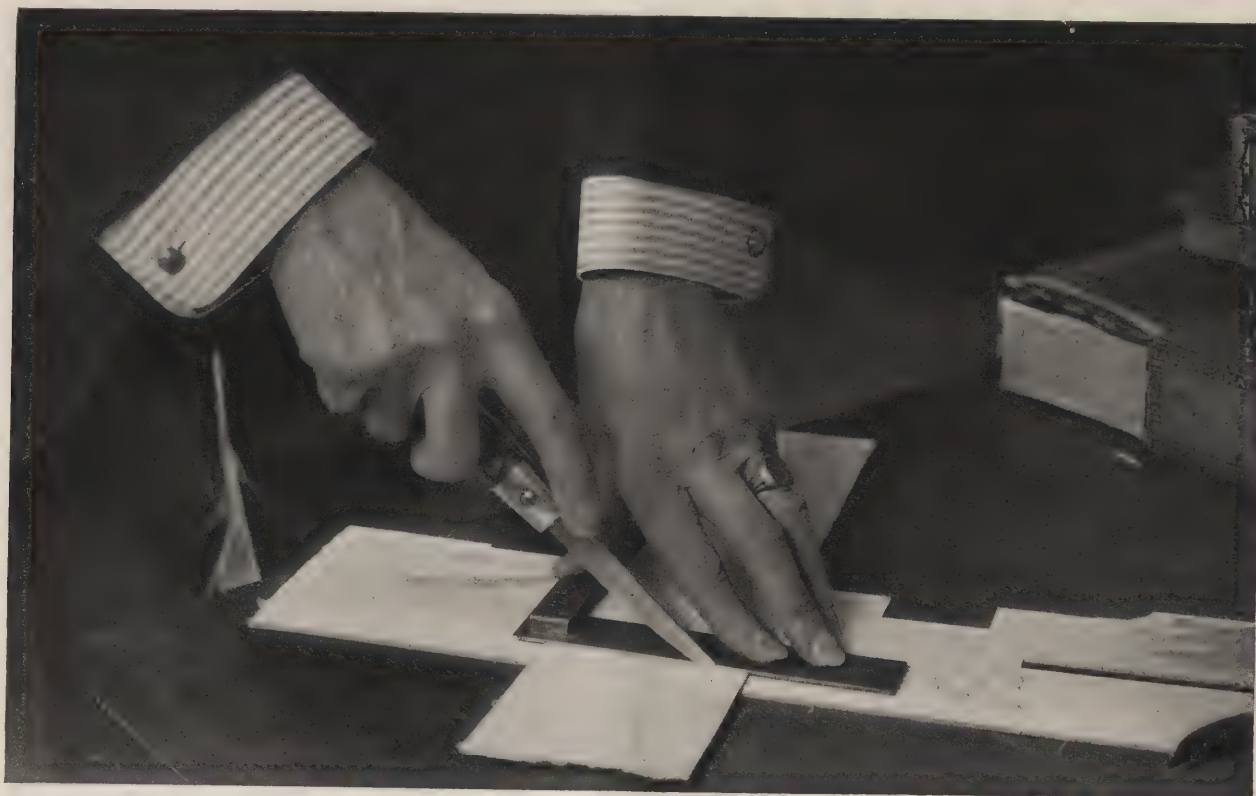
Making the Preliminary or Guiding Cut on the Face of the Cardboard with a Sharp, Heavy Blade.
